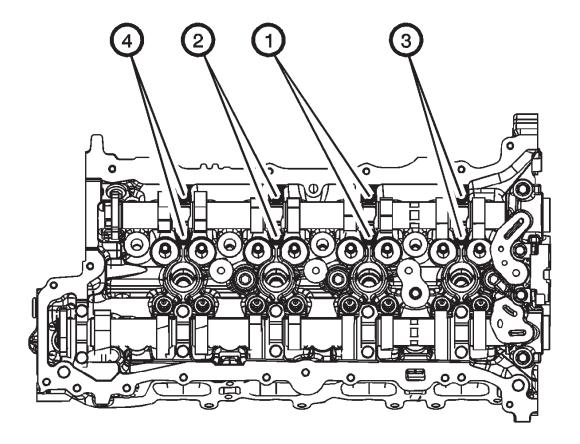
Camshaft Cap Bolts In Sequence Courtesy of GENERAL MOTORS COMPANY
